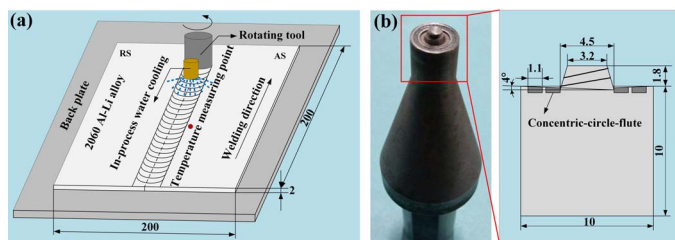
(a) Schematic of water cooling FSW and (b) rotating tool (unit: mm)
